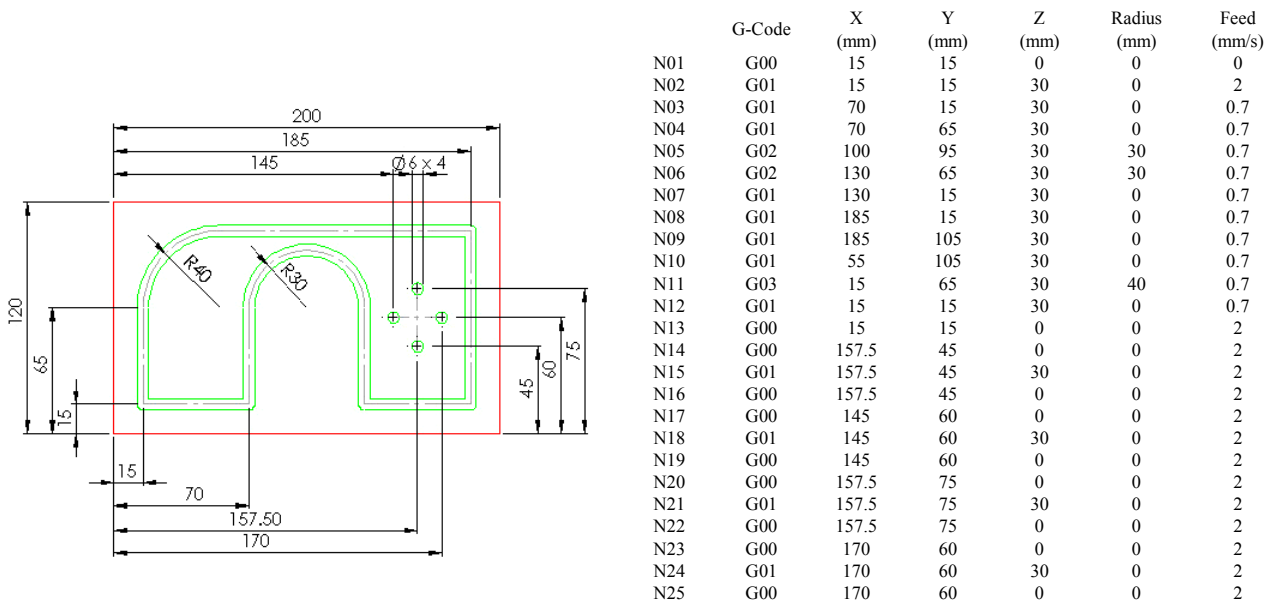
The assigned pattern and programming format used for workpiece milling.
